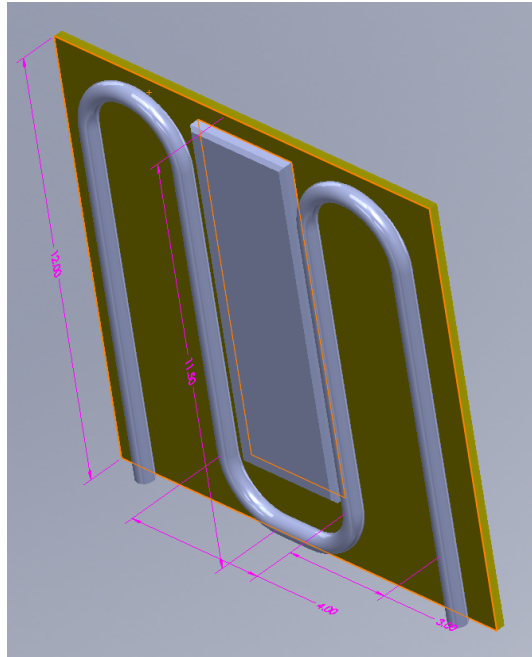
CAD model of copper plate assembly (dimensions shown are in inches).
